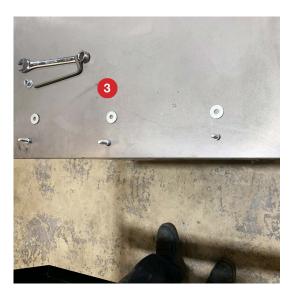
, 2: Removing the bolts from the Support table. Fig. 3: Bolts removed.
